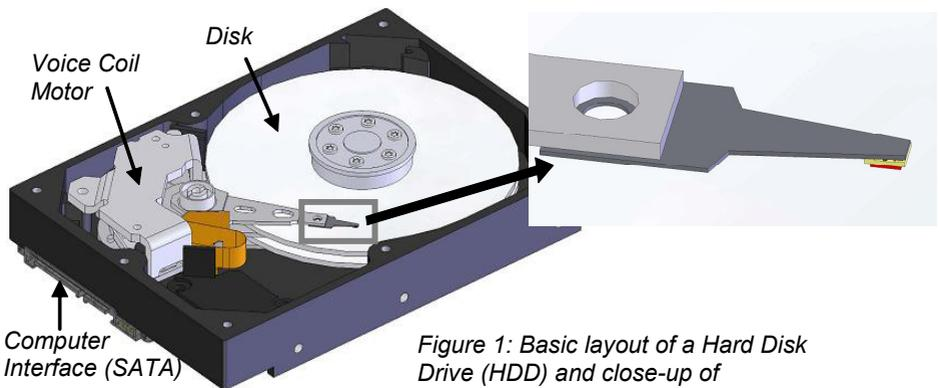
Basic layout of a Hard Disk Drive (HDD) and close-up of suspension & head.
